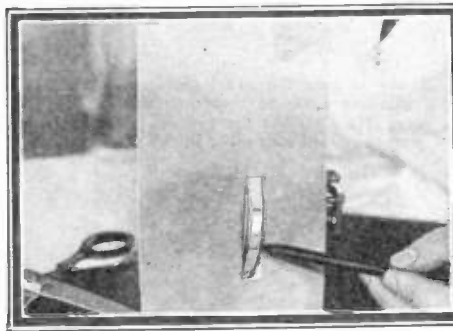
A thin strip of paper just wide enough to completely fill the channel in the hoop is marked off in degrees or numbers and pasted into the channel.
